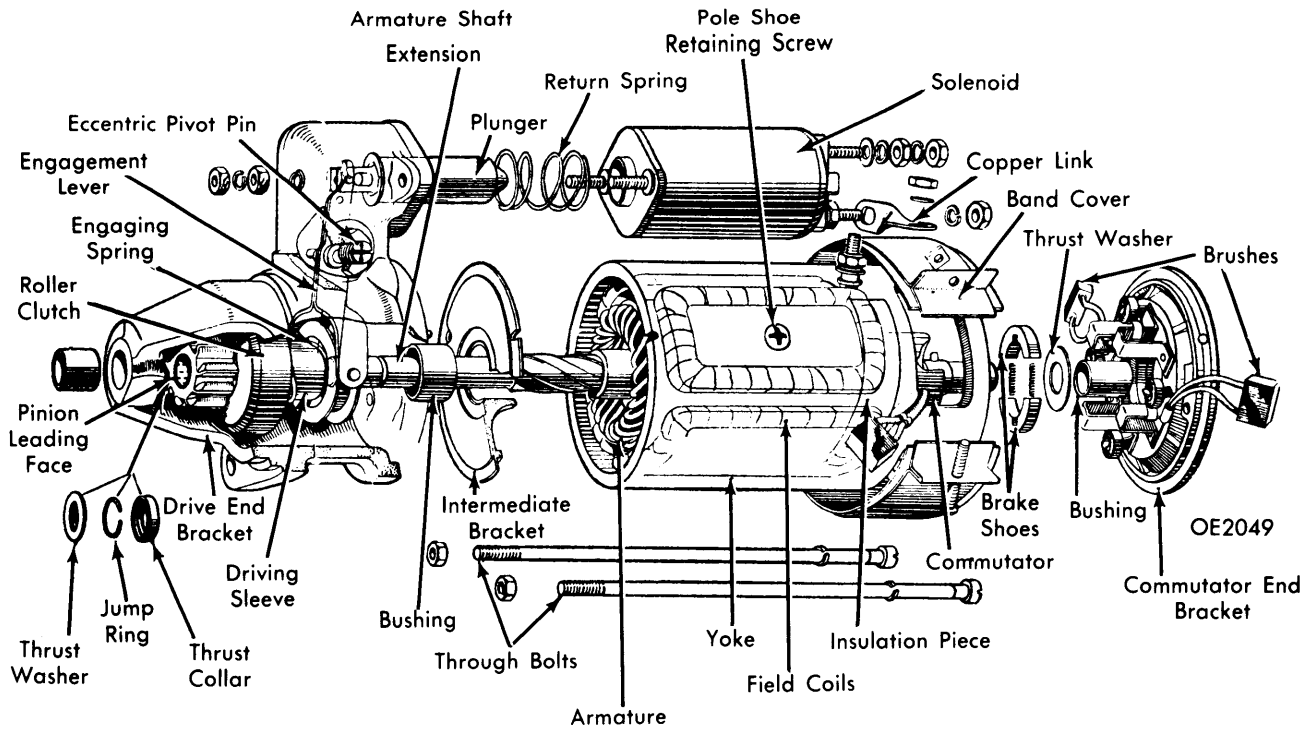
Exploded View of Lucas Pre-Engaged Starter
